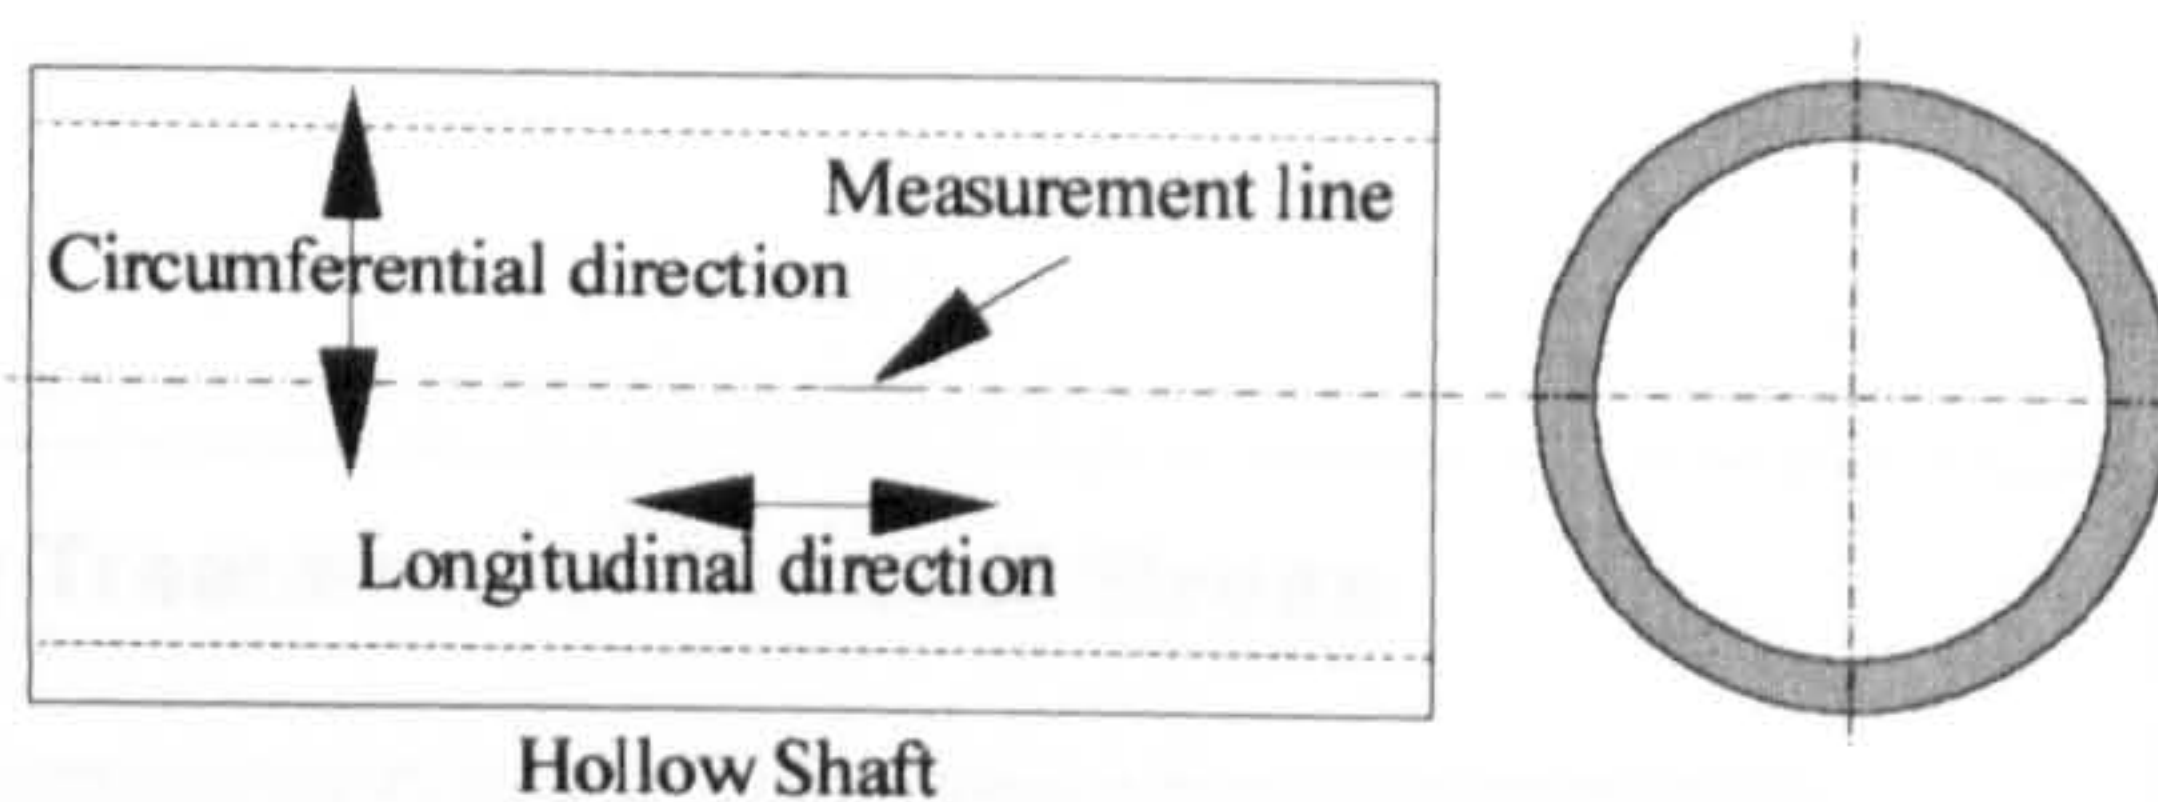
Measurement line in the non-welded specimen.
